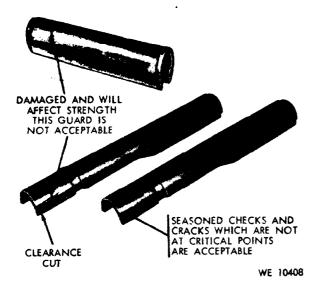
Gun hand guard defects and clearance cut for rifles.
